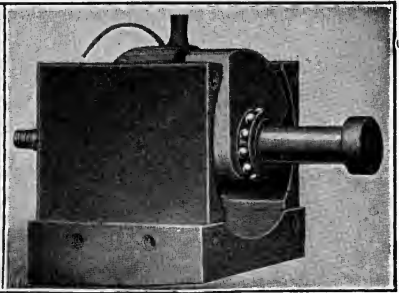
Remy inductor shaft and coil assembled in pole pieces and base.
